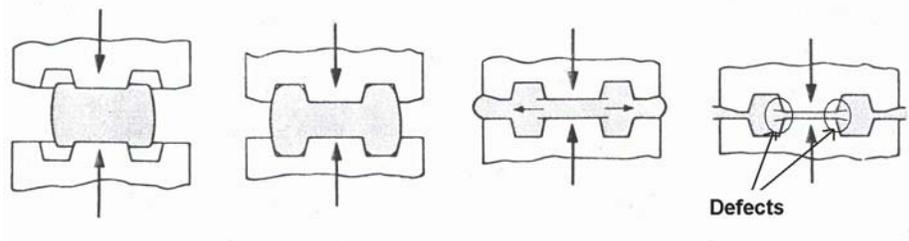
Internal Defects Because of an Oversized Billet in Forging
